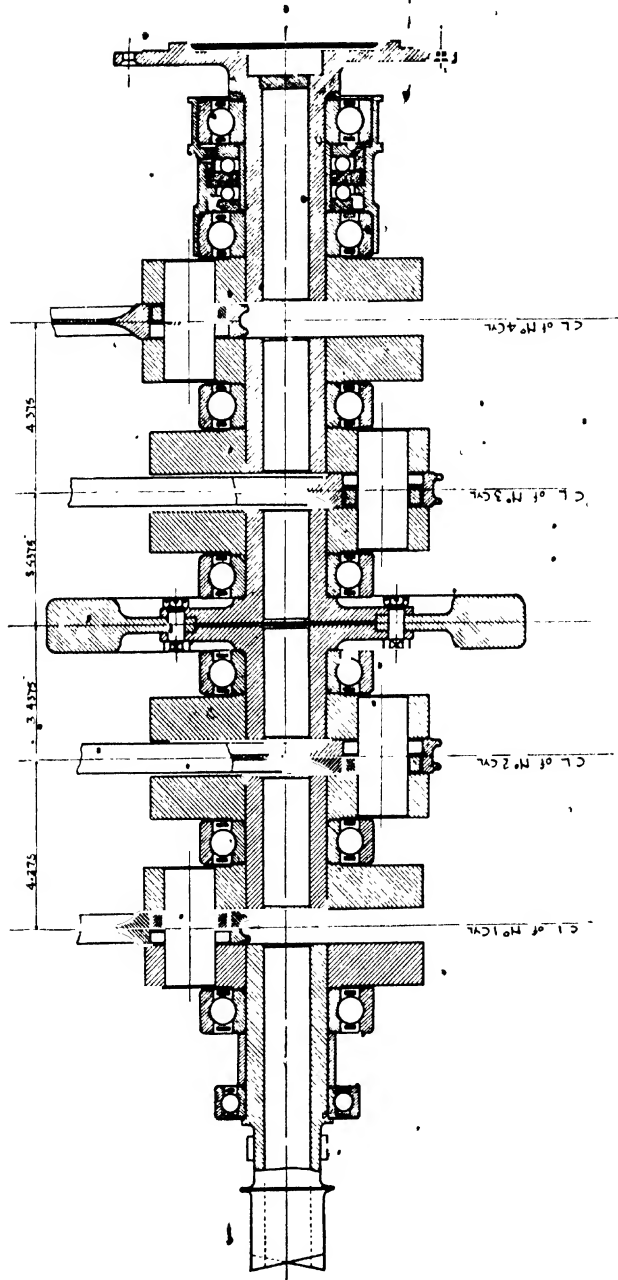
Crankshaft Assembly as used in 3 litre 1922 Vauxhall Racing Engines
